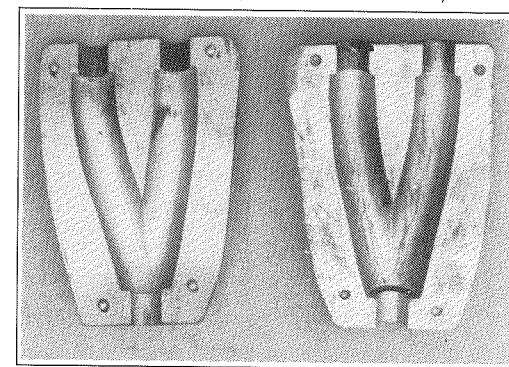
The GRP core mould split in half. then be used to make sand cores. With the wooden manifold pattern and GRP core pattern, sand moulds could be made and I was able to finally get the manifolds cast. Fig. 6.
